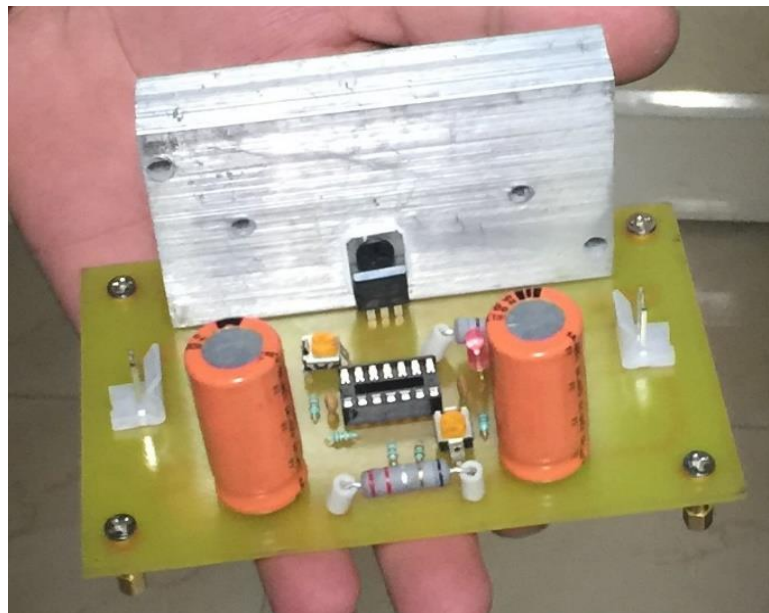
(b): Diagonal view of Fabricated Power Supply
